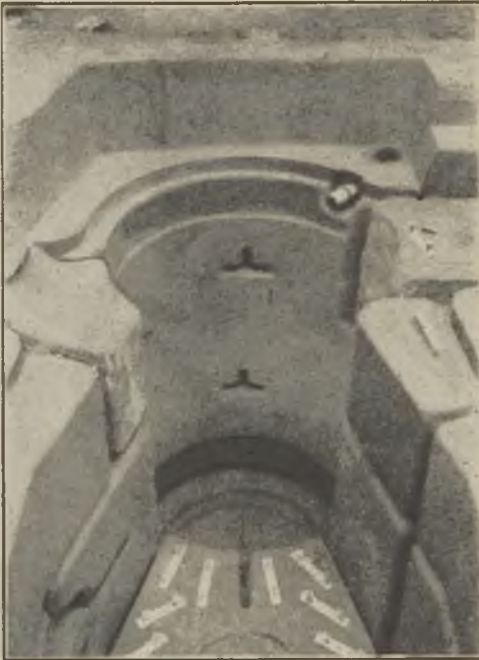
MOULD FOR H.P. CYLINDER SHOWING POSITION OF STEEL TUBE AND CHILLS.
